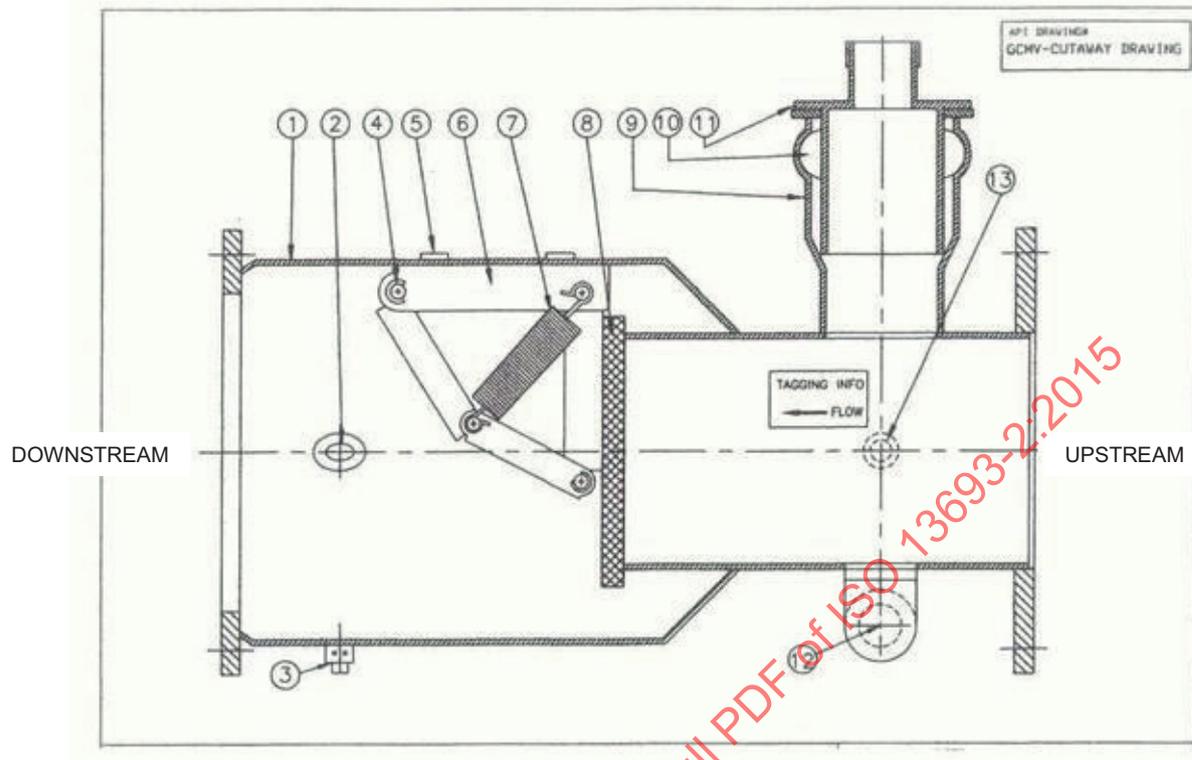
Cutaway drawing of a chemigation valve body assembly
